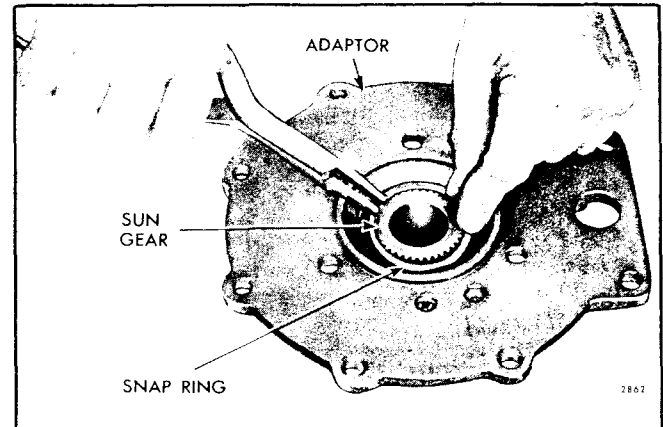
Removing or Installing Sun Gear Snap Ring (2.1:1 Ratio)
